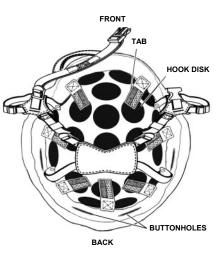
Helmet with Suspension Pads Removed and Cover Installed.
